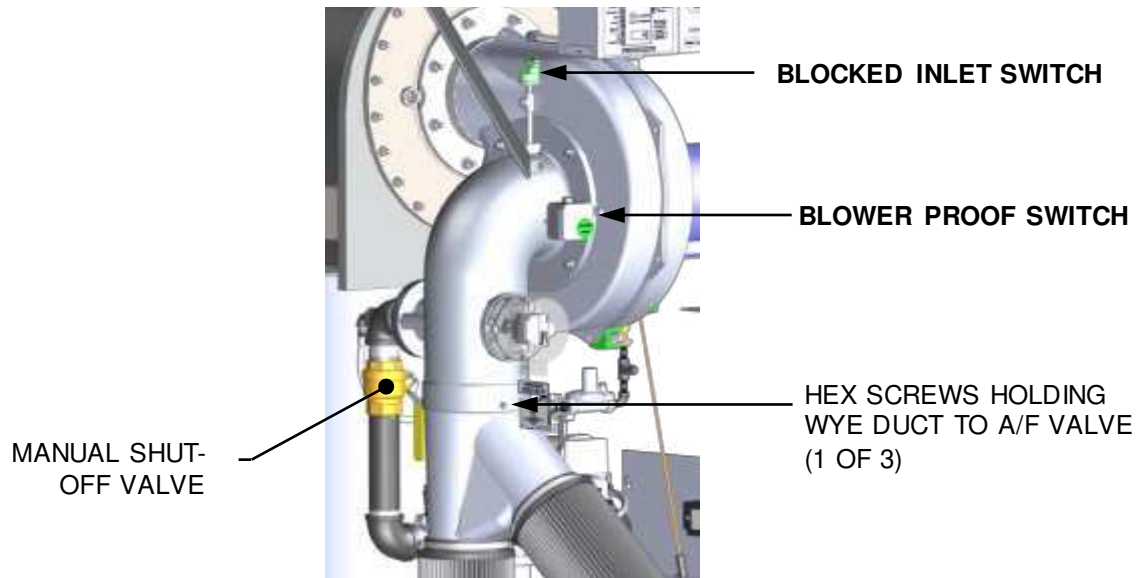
Blower Proof & Blocked Inlet Switch Locations – BMK5000 & 6000
